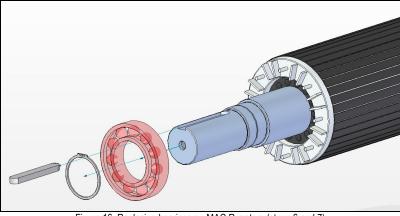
Replacing bearings on MAC R motors (steps 6 and 7)
